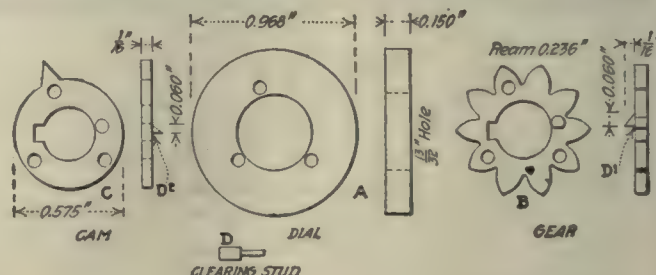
DETAILS OF DIALS, GEARS AND CAMS
